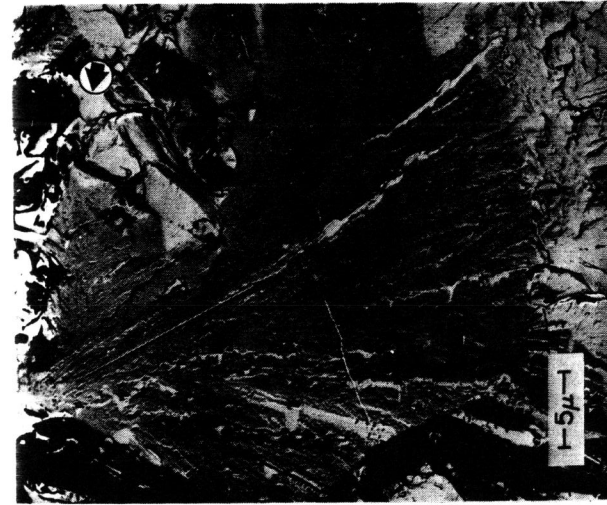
IMPACT FRACTURE OF LOW-ALLOY STEEL (A302B). Cleavage facet with well-defined steps and river patterns in Charpy impact specimen broken at -98° F (17 ft-lbs). Block arrow indicates macroscopic direction of crack propagation. Long arrow indicates local direction of crack propagation.
